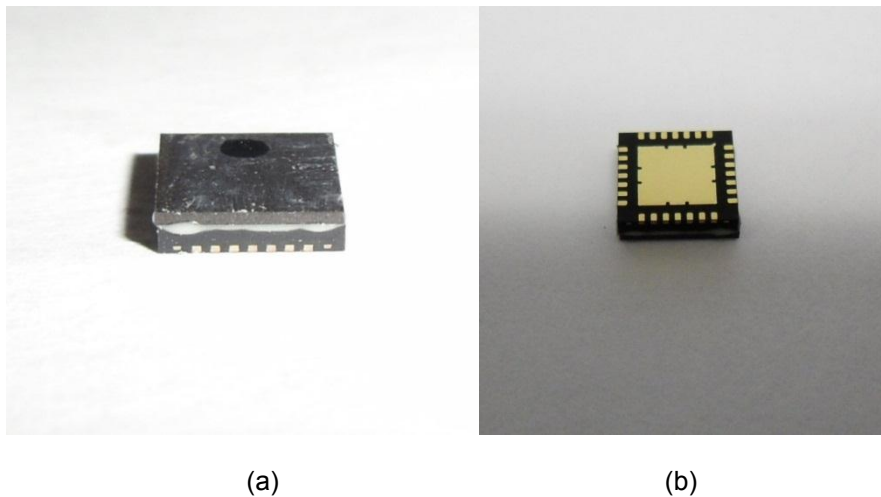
The open cavity package of QFN28 (5×5 mm). Capsulized with a lid (a) and bottom view (b).
